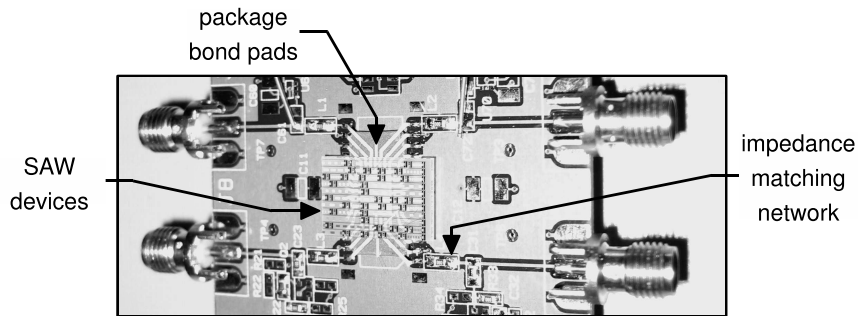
SAW test devices mounted to a package, wire-bonded, and soldered to a test PCB.
